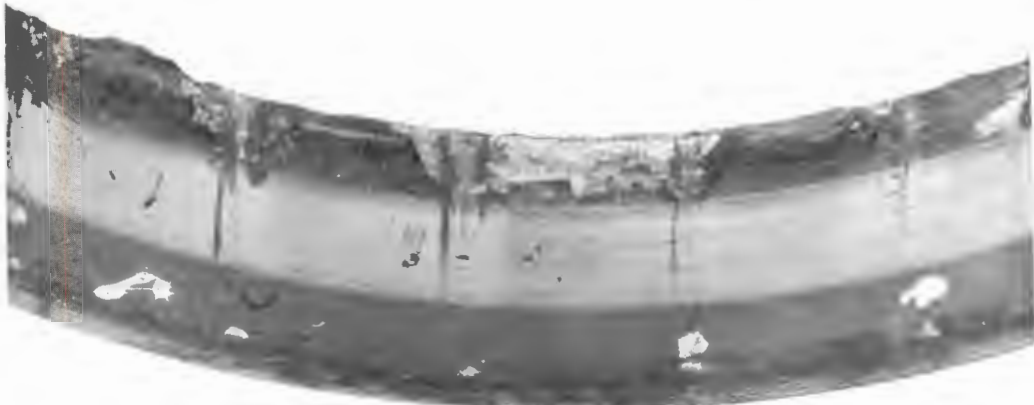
CLOSE-UP VIEW OF OUTER RACE
